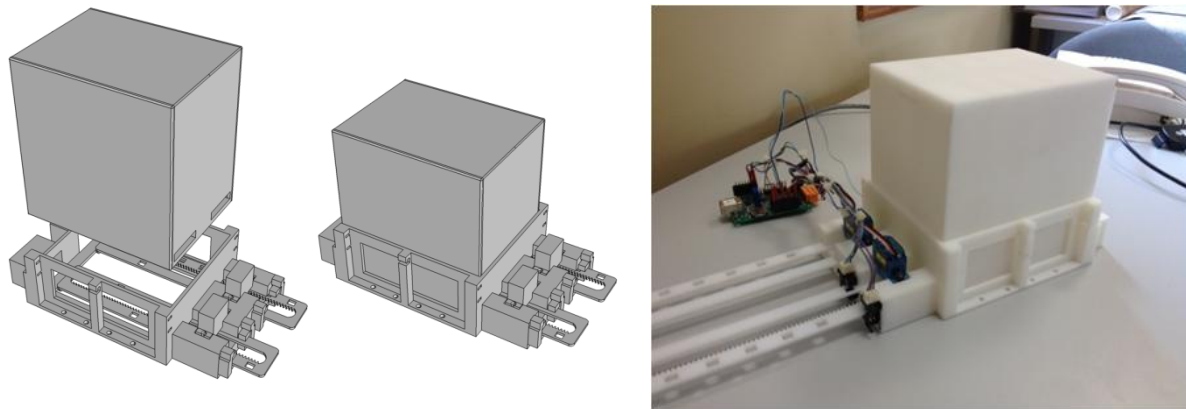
(Left) 3D model of a prototype of a discrete releasing machine. (Right) A real and fully functional 3D printed prototype of the machine in ABS.
